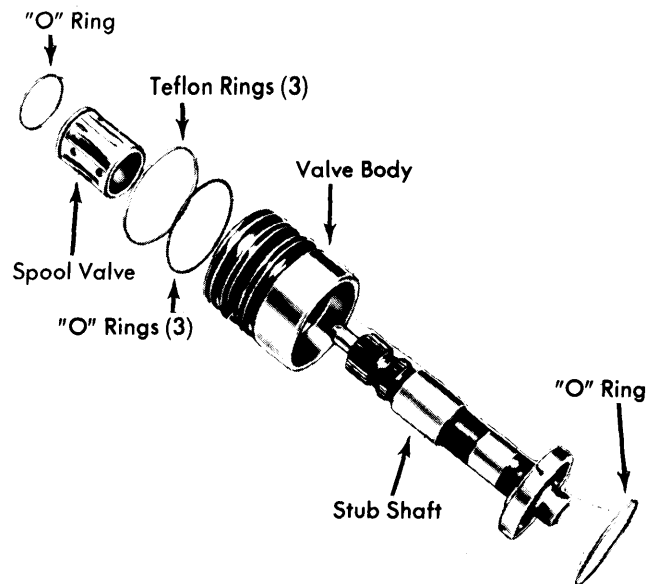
Disassembled View of Valve Body and Input (Stub) Shaft Assembly
